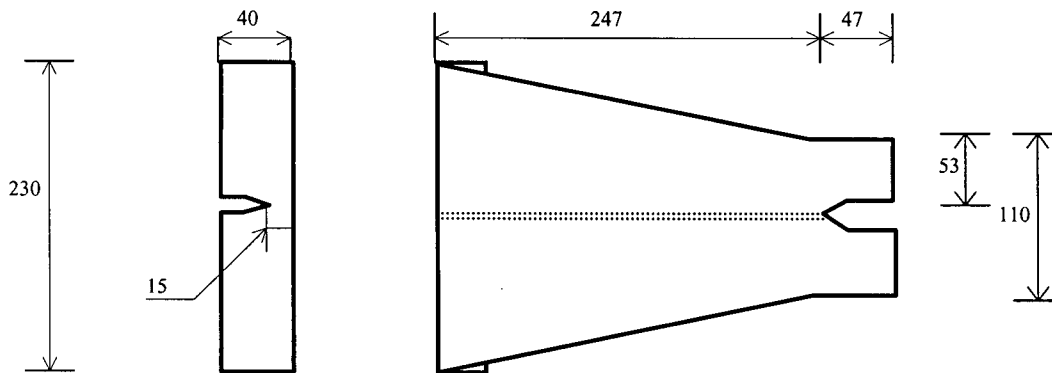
Dimensions of the CDCB Specimen (mm)
